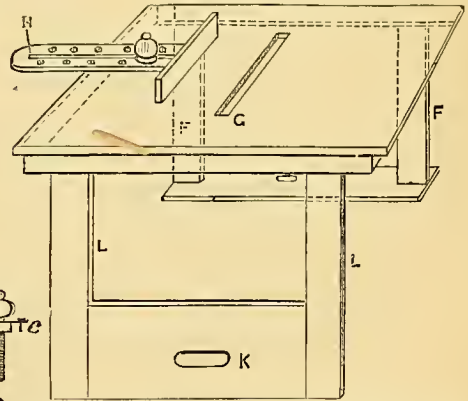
TABLE WHEN REMOVED FROM LATHE
